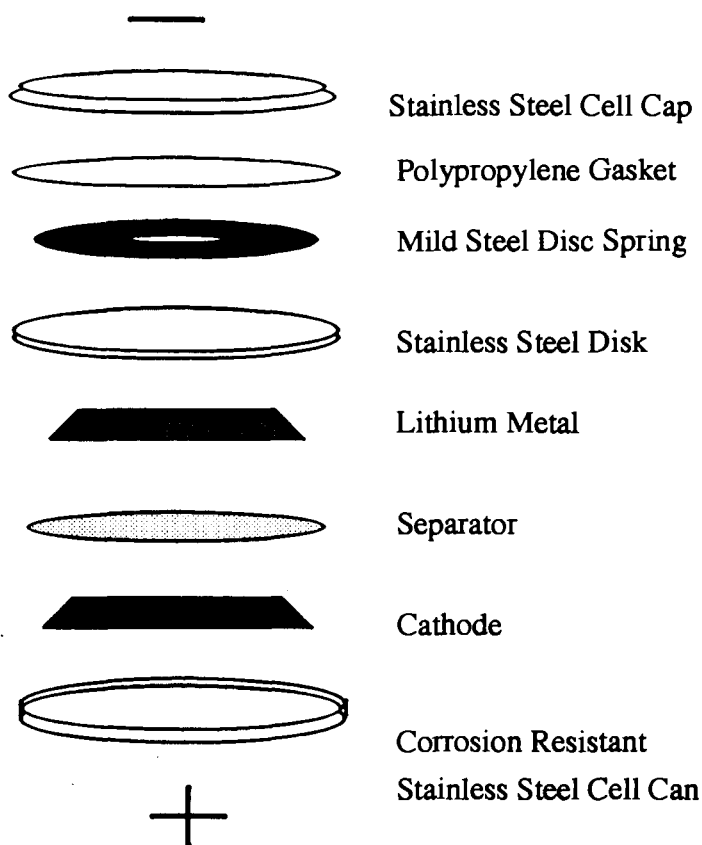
Exploded View Of a Typical Lithium Coin Cell
